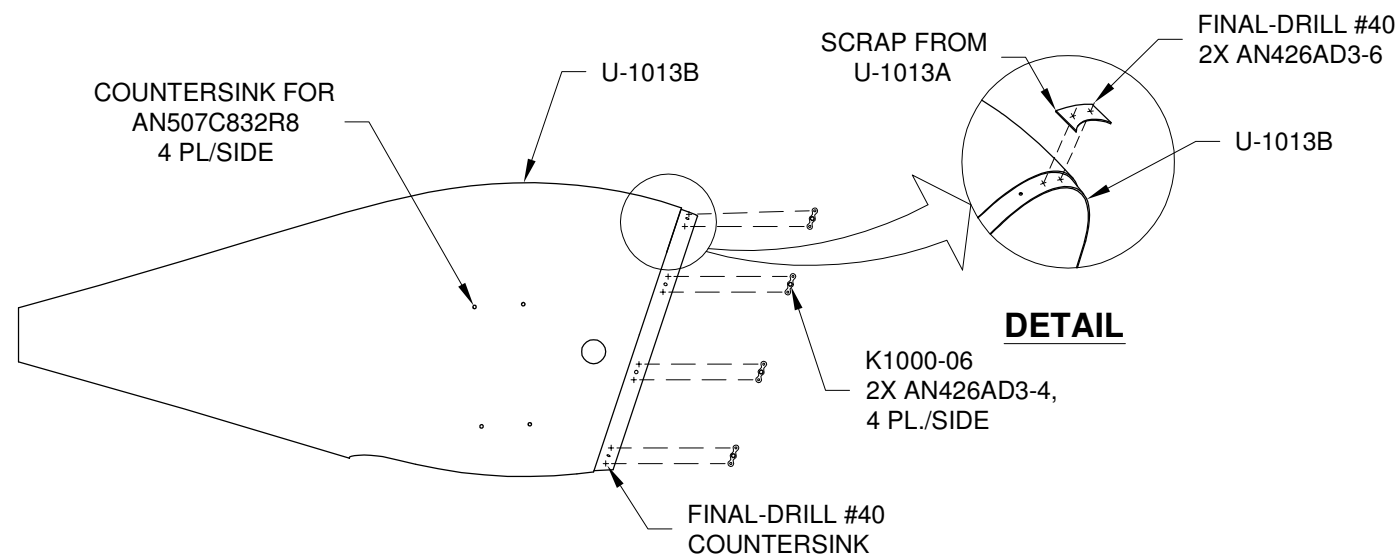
RIVETING NUTPLATES TO THE WHEEL FAIRING REAR
